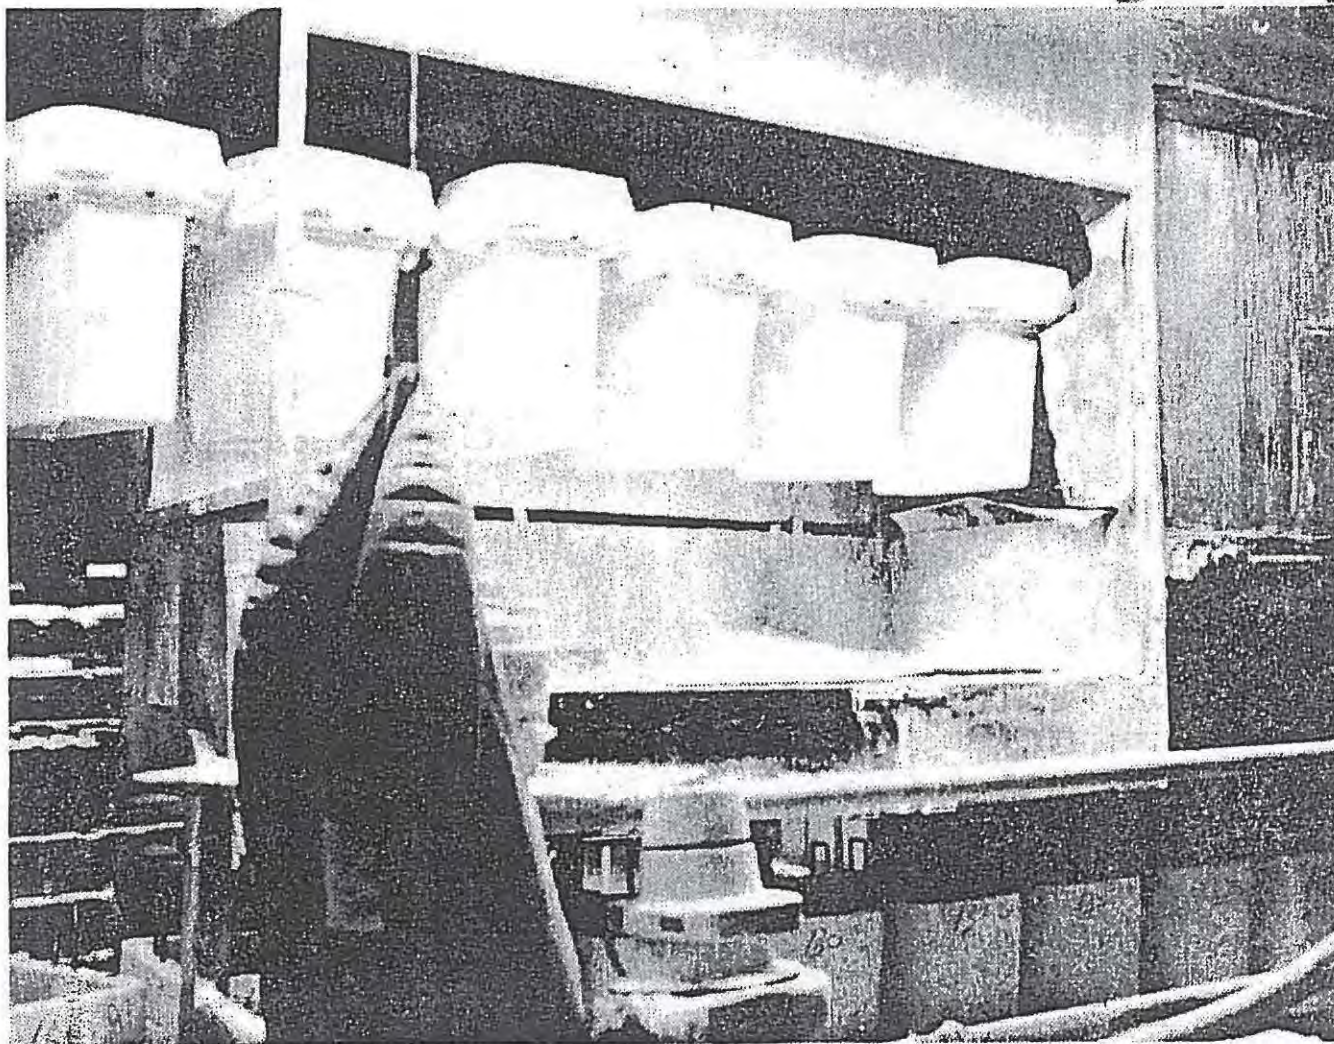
Backdraft Hood for Control of Talc Dusting of Molds at Tank Line
